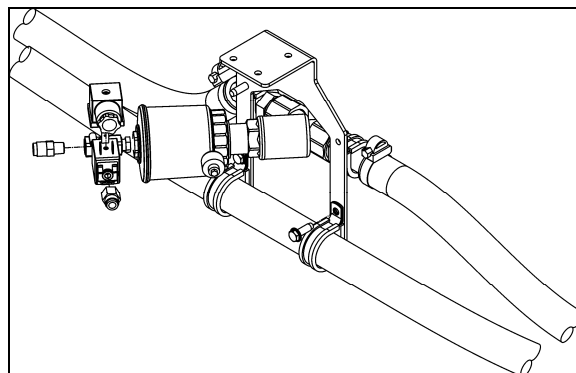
TYPE 2 (FROM VIN F-7015) DRIVER'S UNIT HOT WATER PNEUMATIC VALVE ASSEMBLY
